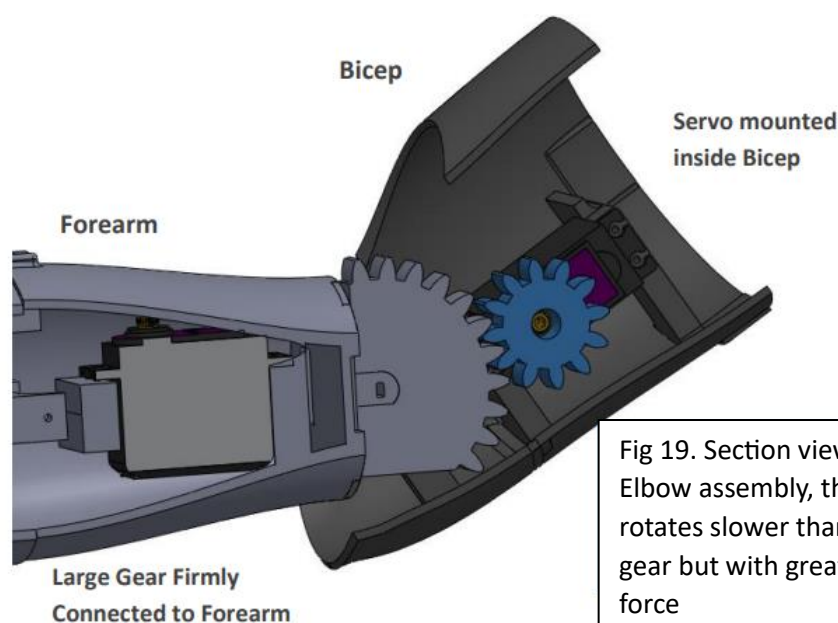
Section view of the Elbow assembly, the large gear rotates slower than the small gear but with greater turning force
